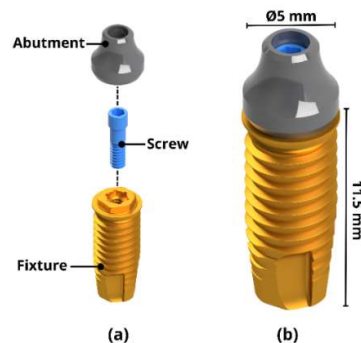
Components and assembly of the dental implant system: (a) Exploded view showing the abutment, screw, and fixture; (b) Assembled implant illustrating the final configuration.
